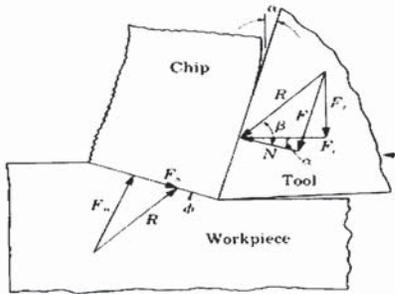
Forces acting on a cutting tool in two-dimensional cutting.
